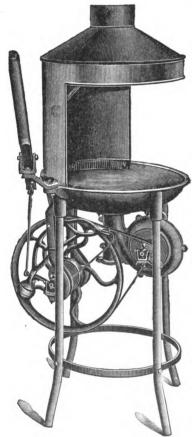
Portable Hand Forge Courtesy of Canedy-Otto Company
